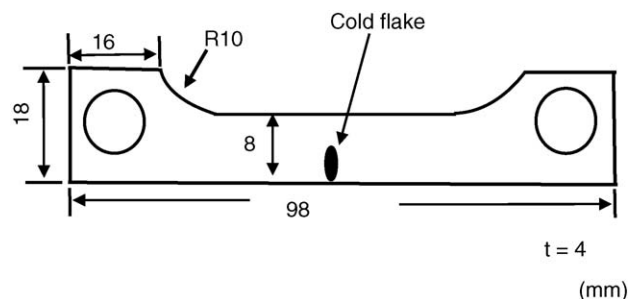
Shape and dimensions of specimen for bending test having a cold flake at a center.
